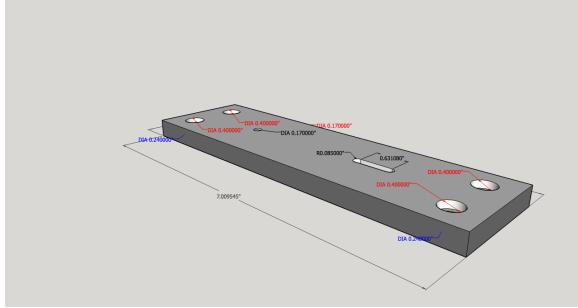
Aluminum base for the sFPI cavity system. Full layout drawings with measurements can be found on page 11
